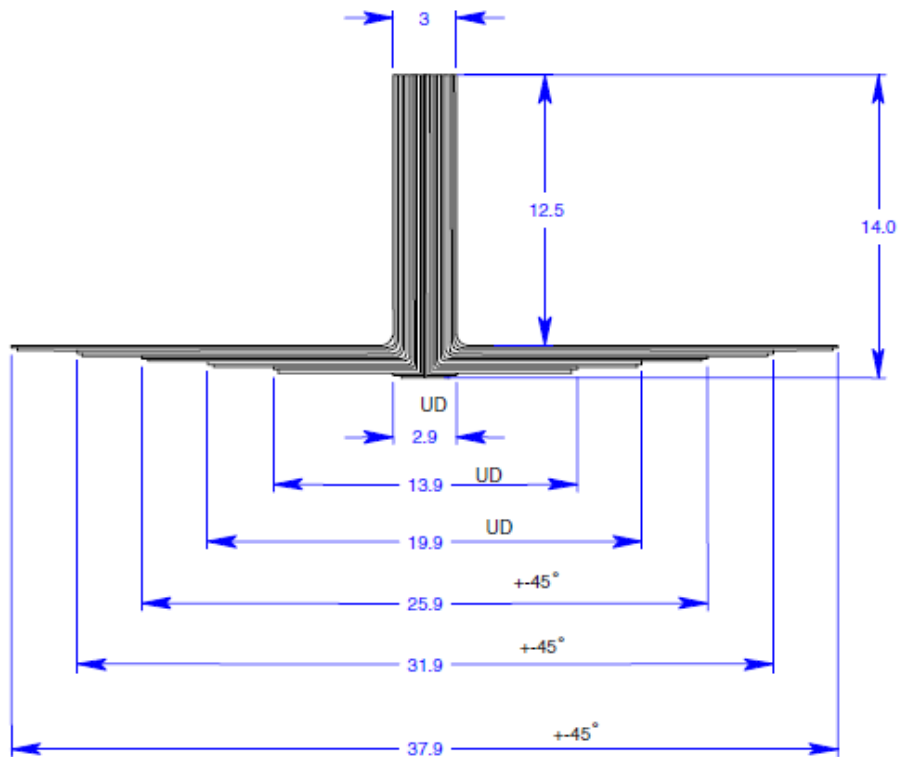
Dimensions of the Cross-section of the stiffener (mm) [39]
